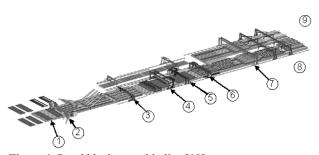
Panel block assembly line [10] Slika 1. Linija za proizvodnju panela i blokova [10]
